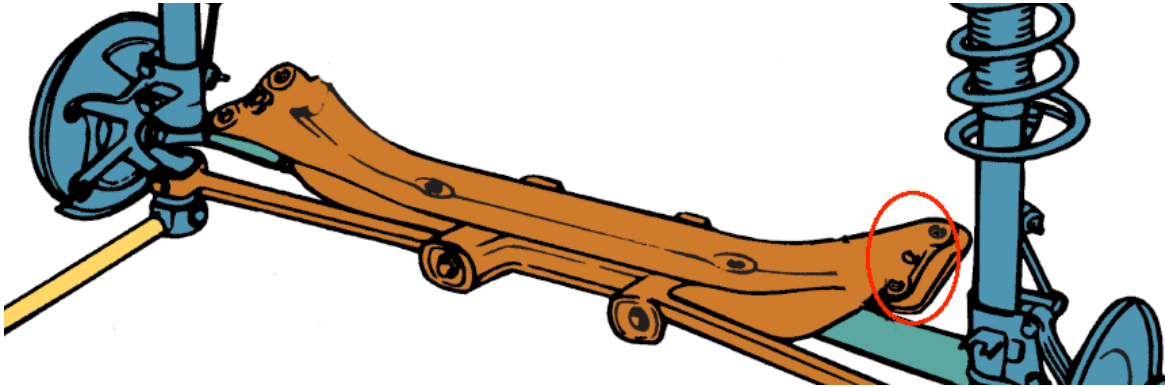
Check rear subframe mounting bolts, washers, and bolt holes.
